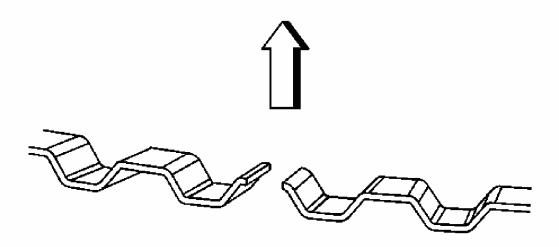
Aligning Oil Control Ring Expander Courtesy of GENERAL MOTORS CORP.
